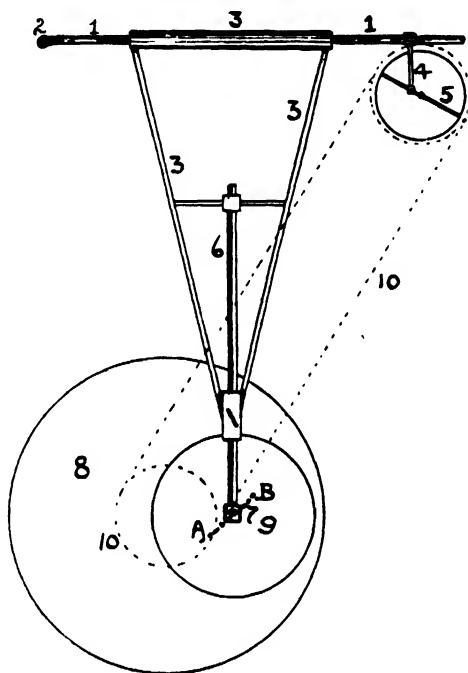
A GRINDING AND POLISHING MACHINE FOR OPTICAL GLASS.
